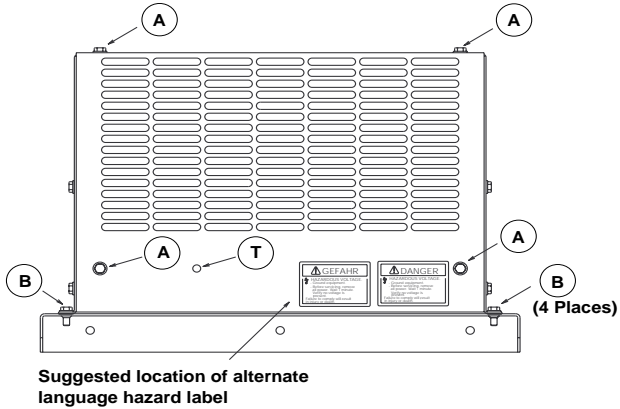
Removing Cover and Bottom Pan: VW3A66711, 712, 713, 714
